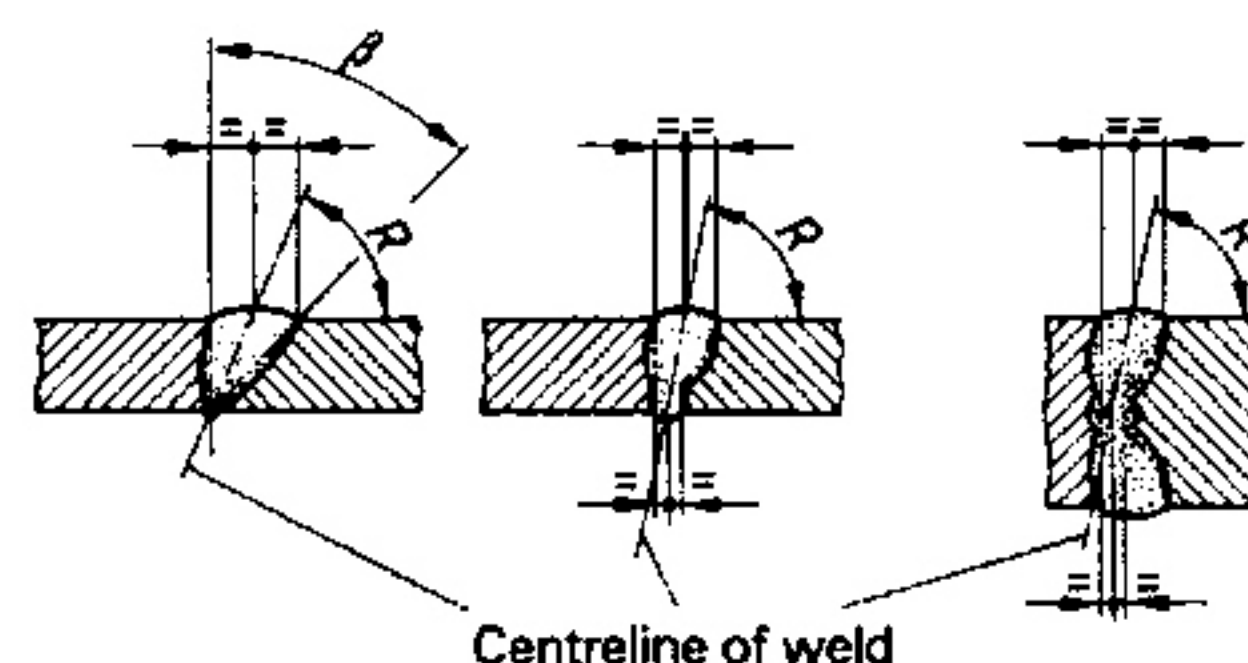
Examples of rotation, R , of asymmetrical butt welds with horizontal workpiece surface
